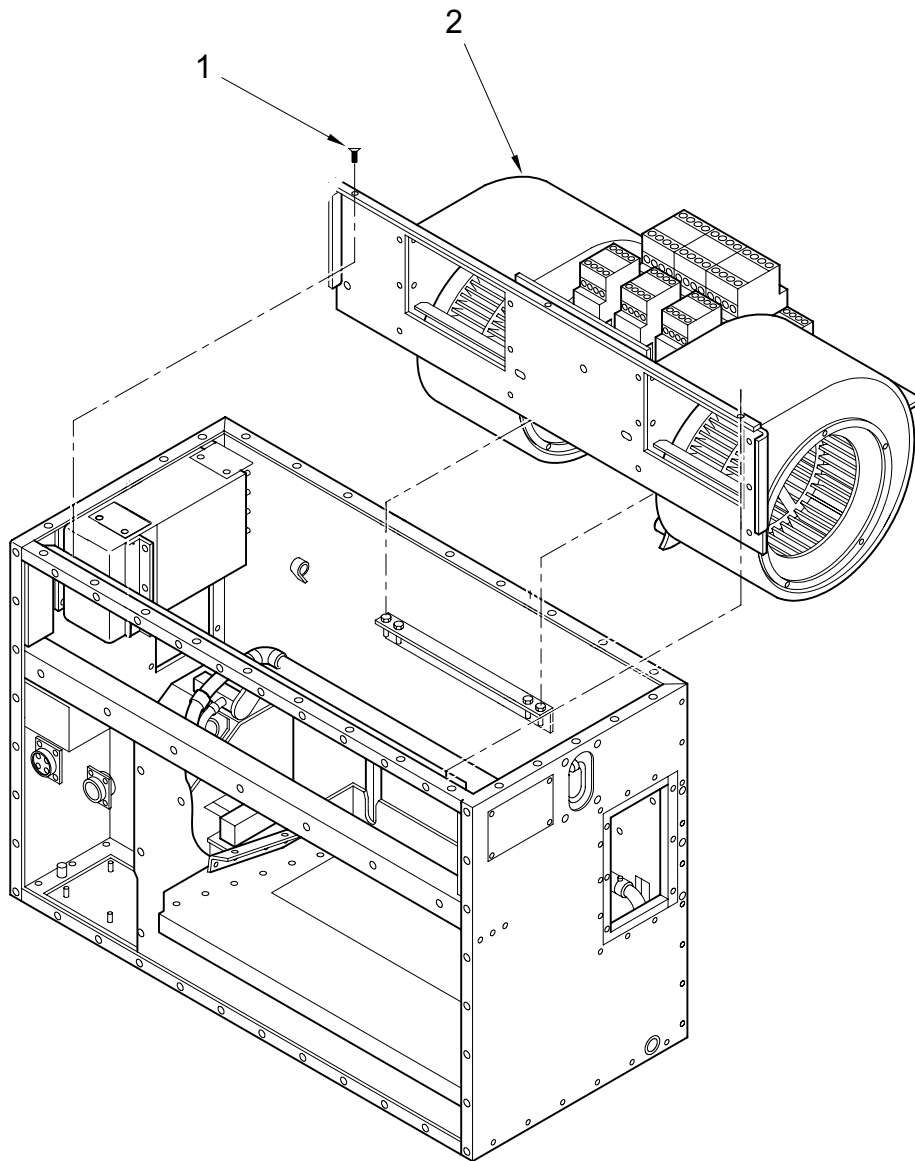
EVAPORATOR BLOWER AND MOTOR ASSEMBLY - LOCATION
